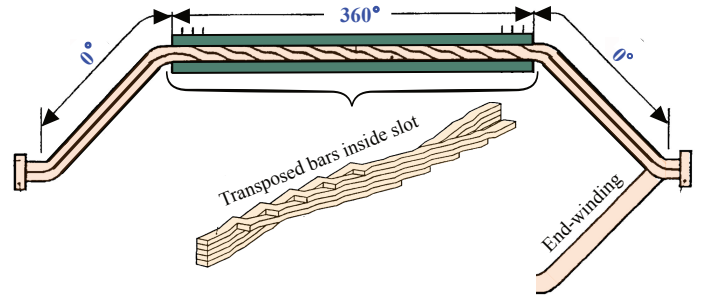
Full length of roebel bar composed of strands short-circuited at both ends by brazing lugs through the stator slot of a large AC machine [16]. The cross-section of the iron core part is under investigation herein.
